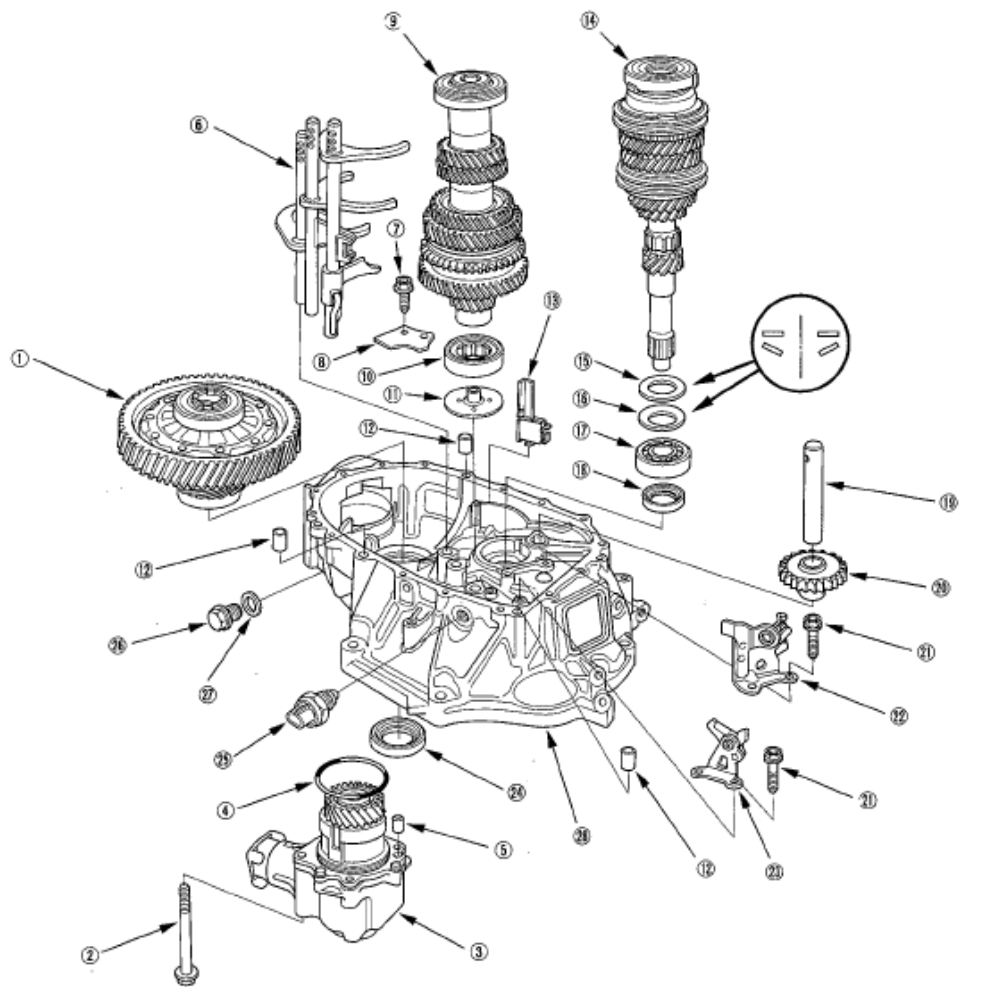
Exploded View Of Clutch Housing (2WD) With Torque Specifications
